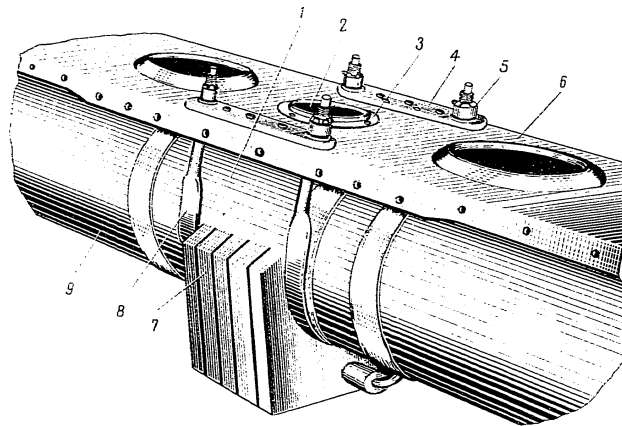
STANDARD ATTACHMENT UNIT OF ROOT BLADE
